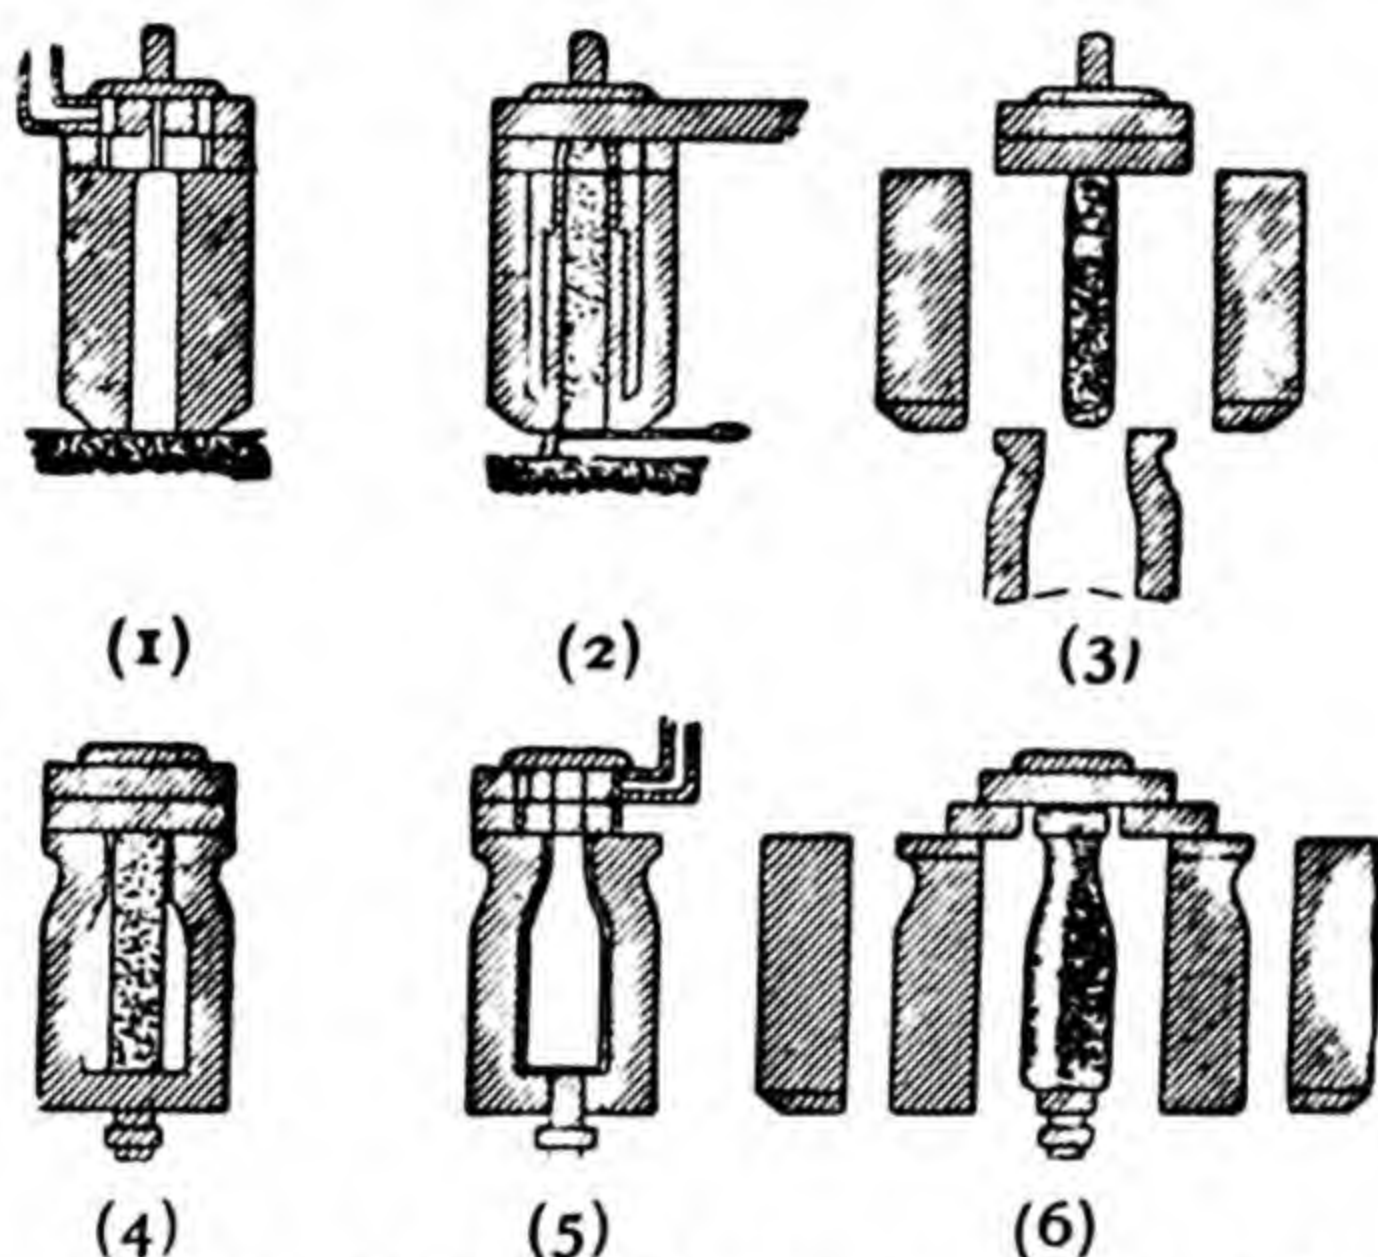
Glass bottle machine. An empty mould is brought just above the molten glass, (1), and a rod of glass is sucked into it, (2). This mould then goes away, and its place is taken by another mould, the shape of a bottle, (3) and (4). The glass is blown out to fit this mould, (5). The mould then moves away, (6).
